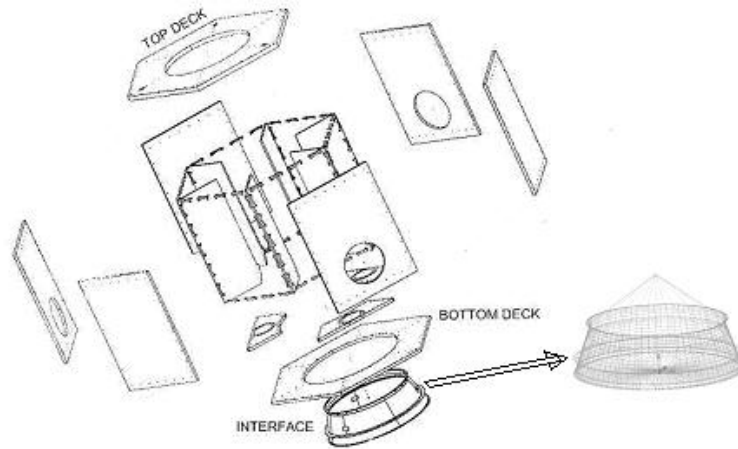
Exploded View Of Spacecraft Structure Showing Base/Interface Ring
